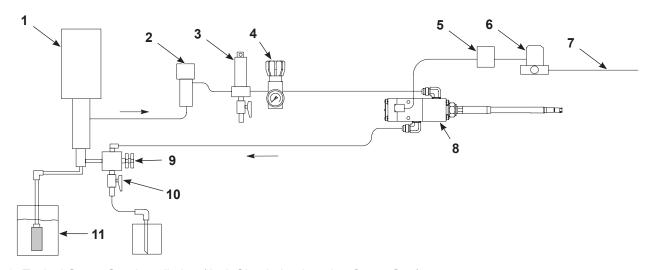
Typical Spray Gun Installation (A7A Circulating Lancing Spray Gun)
